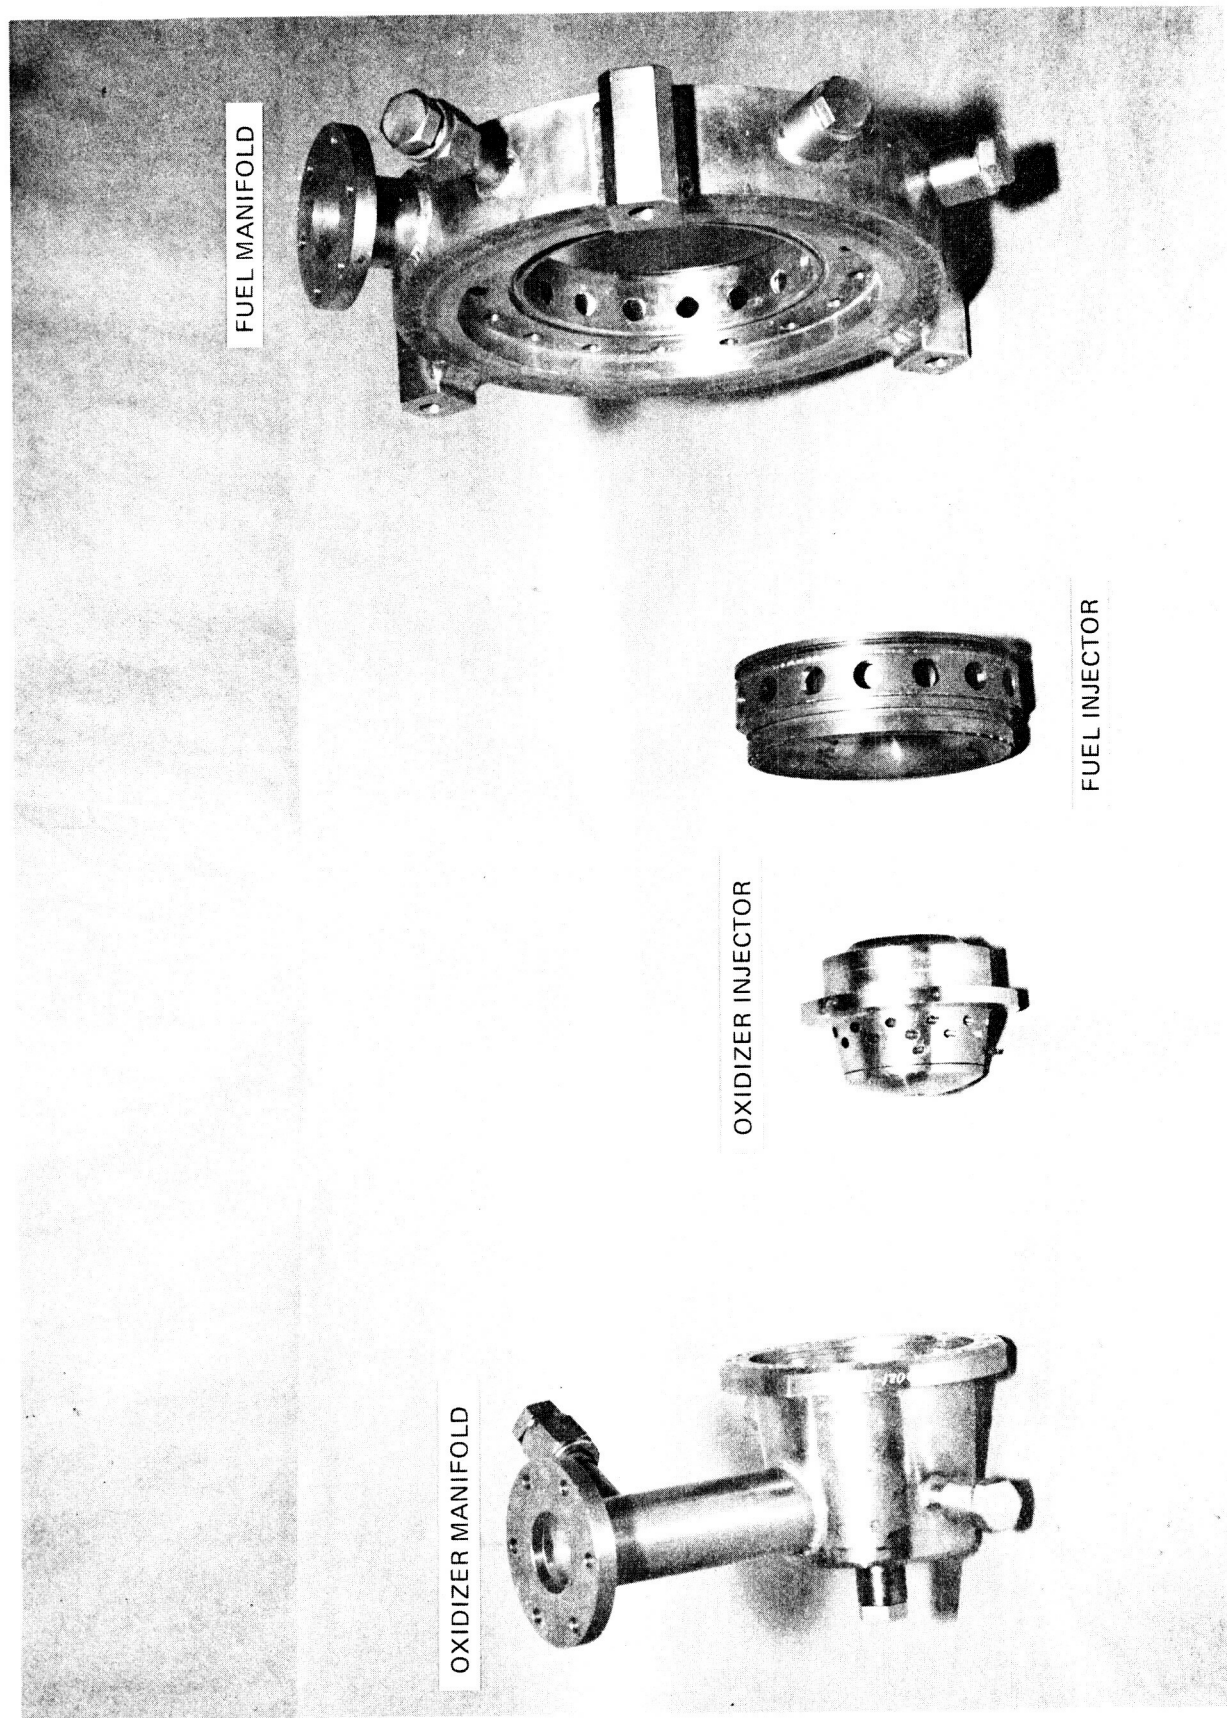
Heat Sink/Sea Level Oxidizer and Fuel Injector Assemblies
